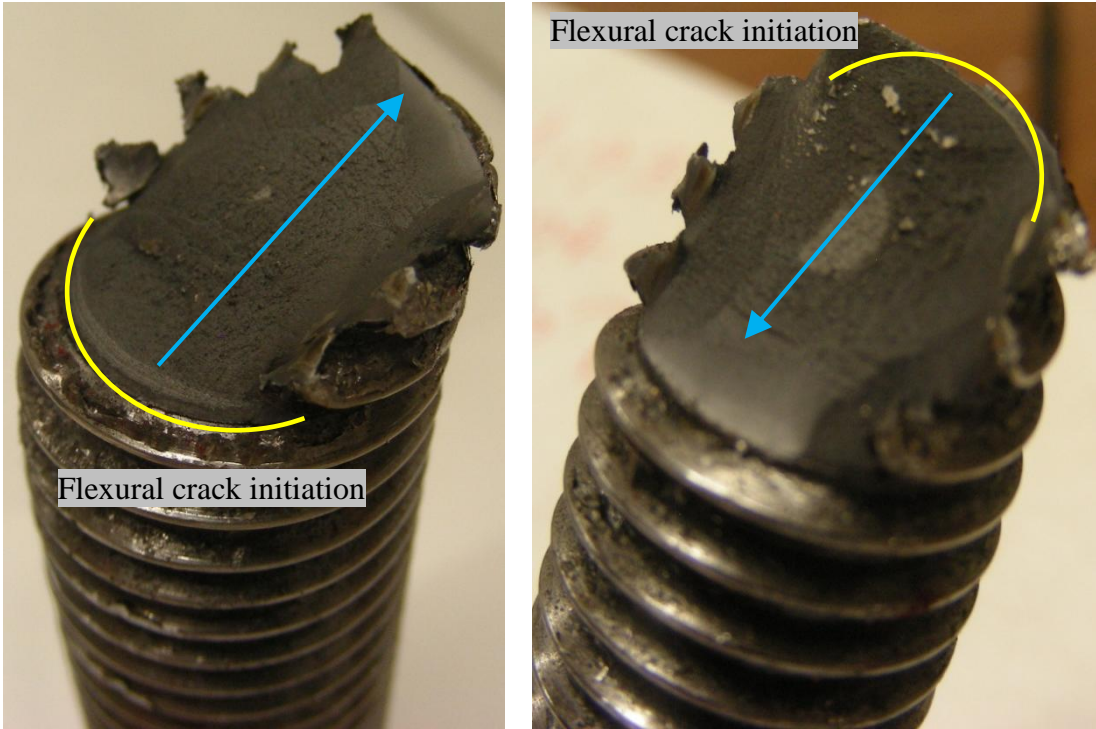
fracture surfaces of A193-4da-RL
